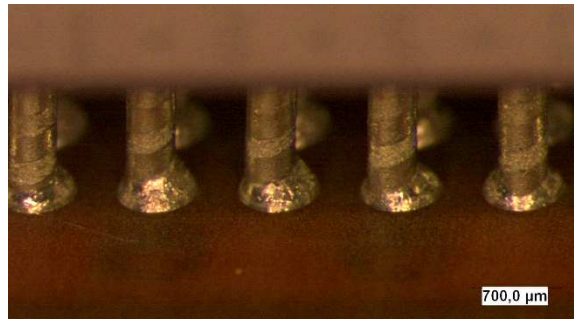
CCGA 625 Six-Sigma after automatic assembly on ENEPIG PCB.
